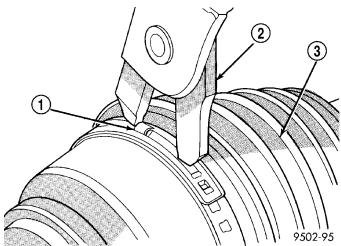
Clamping Tool Installed on Sealing Boot Clamp
